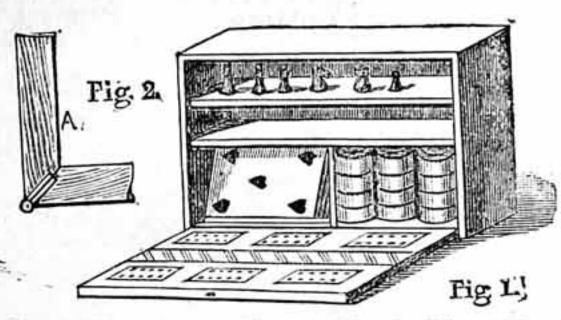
Box Open. Fig. 2.—How to hinge Front (Marking Board) to Bottom Board, in order that it may lay quite flat.
